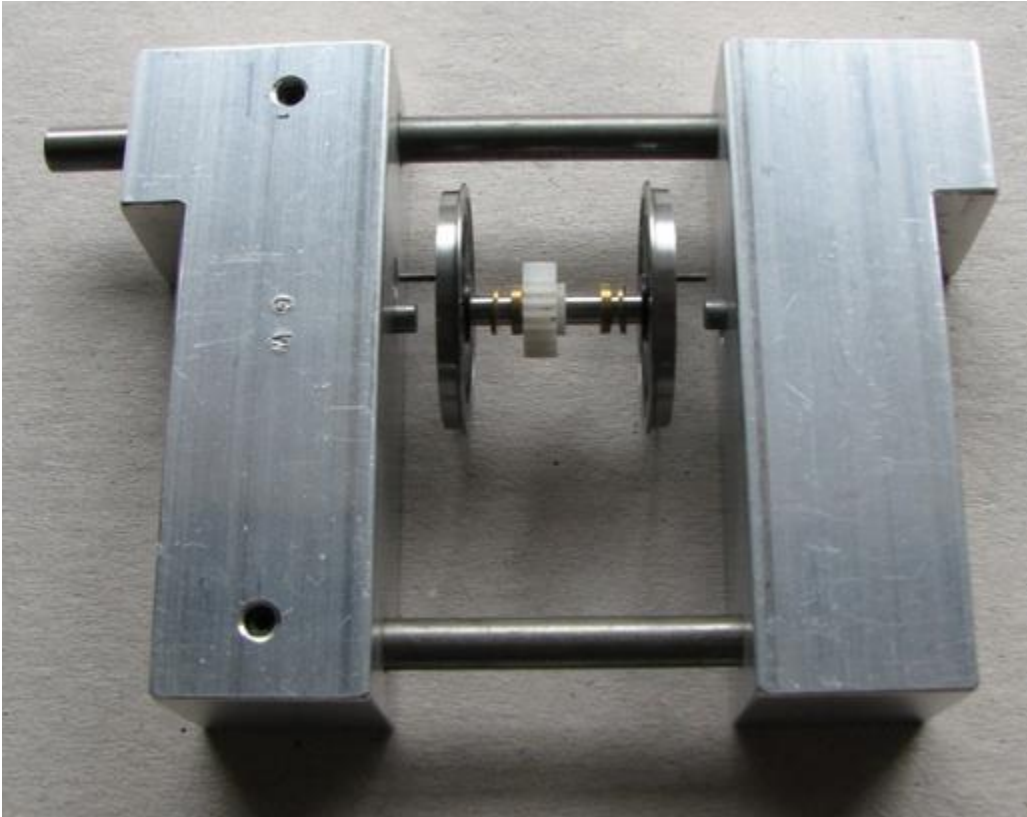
This photo and the next (42) show the GW wheel press being used to mount the wheels to their respective axles. Do not forget the spacers before mounting the wheels!
